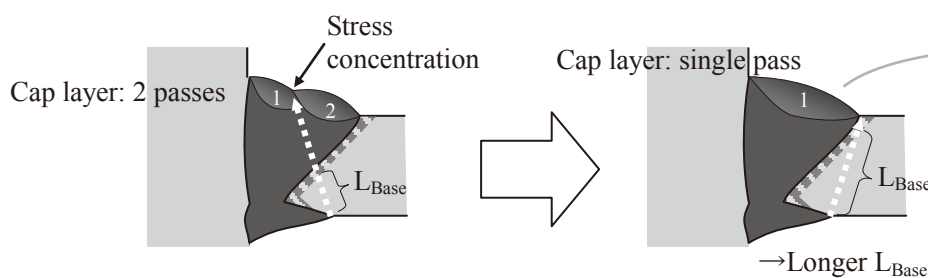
Further improvement suggestion by cap layer welding
